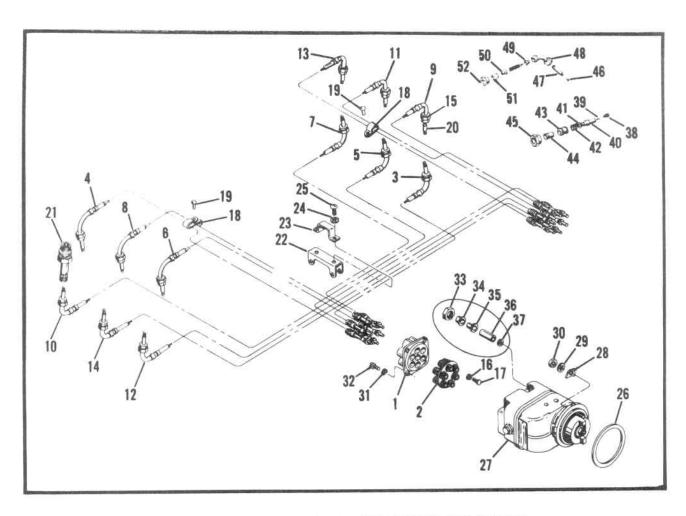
EXPLODED VIEW OF IGNITION SYSTEM.
